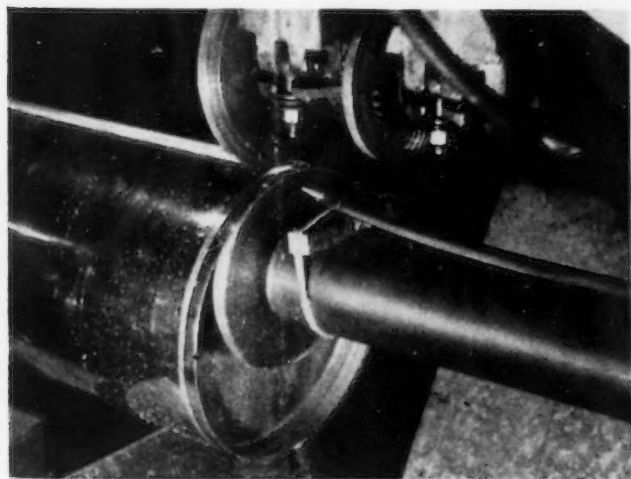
Tempobrazing the head of a copper hot water tank with a modified seam welder.
